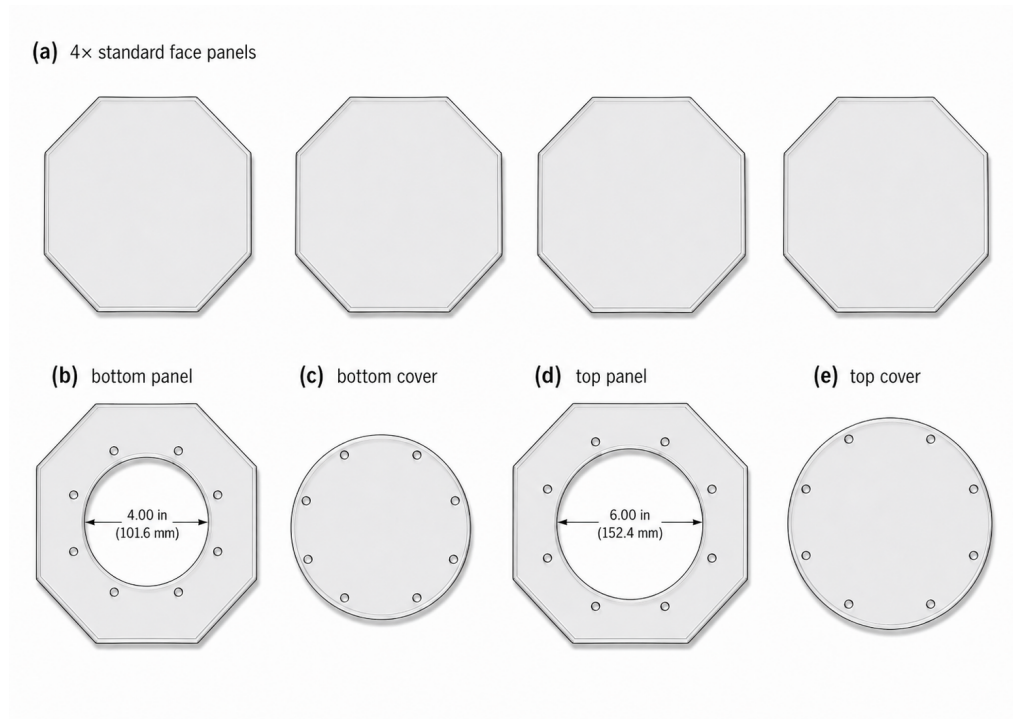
Acrylic panel set used for the redesigned chamber, including (a) four standard face panels, (b) the bottom panel with a 4 in circular opening, (c) the bottom cover, (d) the top panel with a 6 in circular opening, and (e) the top cover.
